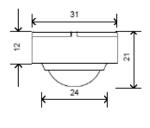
Mechanical dimensions of 2Sens ML mini (42001) in mm (Ø31x21)
